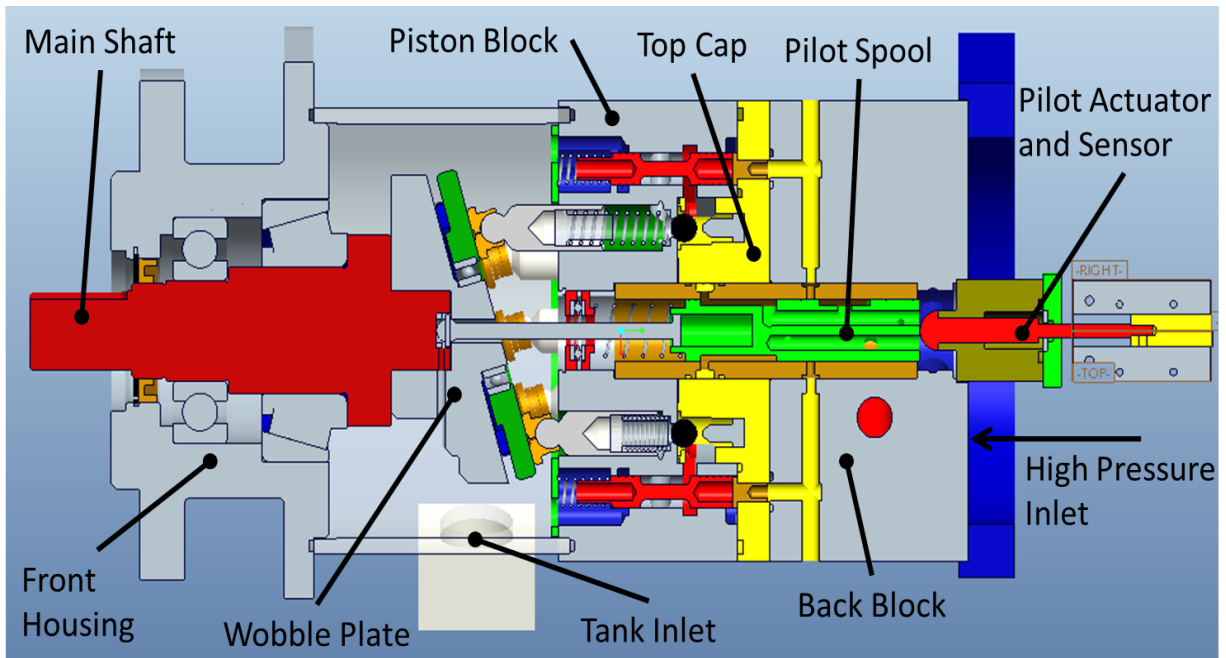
Cross sectional view of prototype pump/motor assembly
